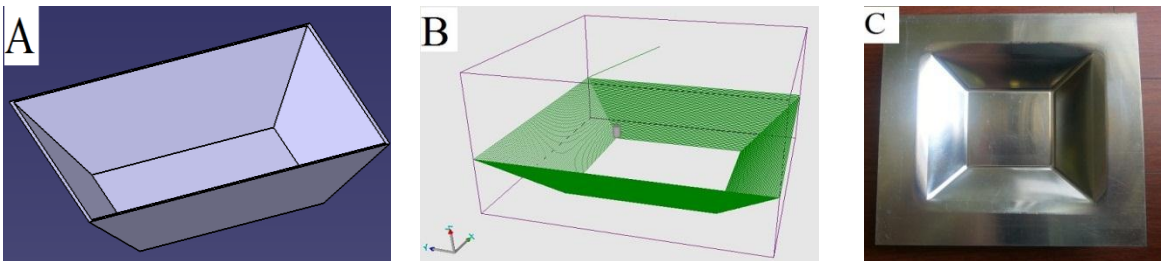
Pyramid with 45° wall angle, (A) CAD design of the part, (B) CAM tool path simulation, (C) Actual formed part
